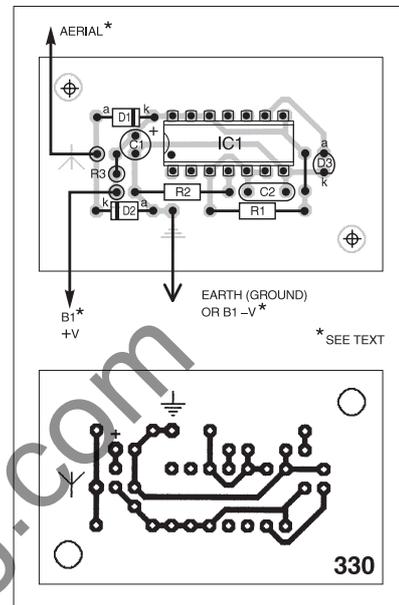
Component layout, wiring and full-size p.c.b. copper foil master.
